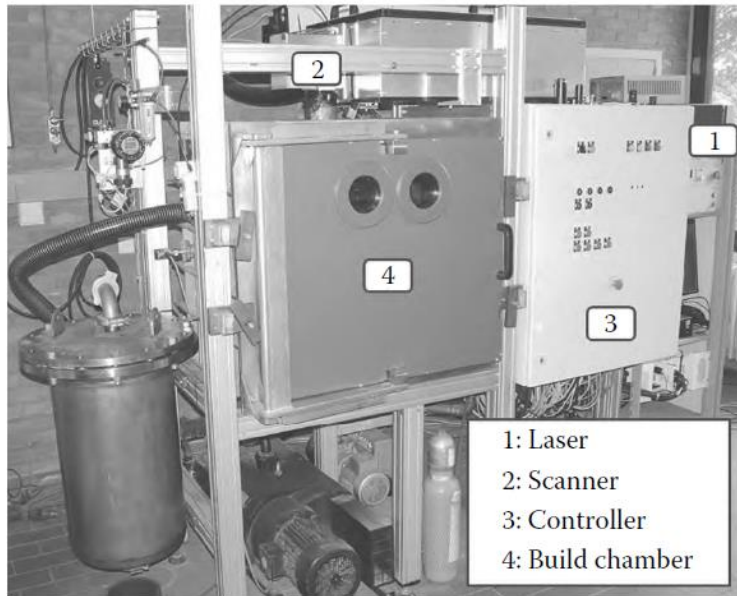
In-house SLM machine developed at KU Leuven.
